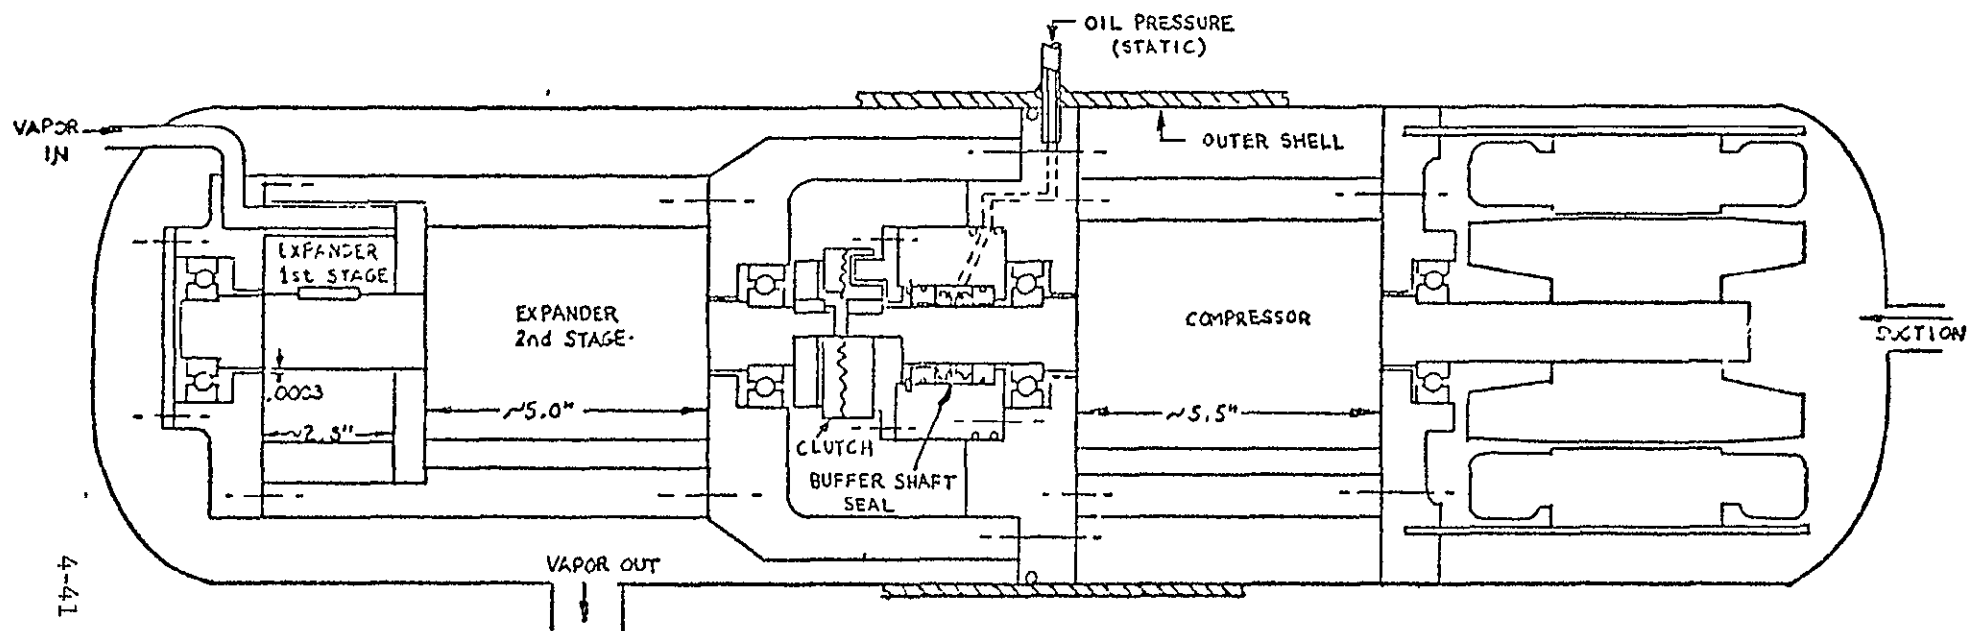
Preliminary Hermetic Expander/Compressor/Motor Assembly
